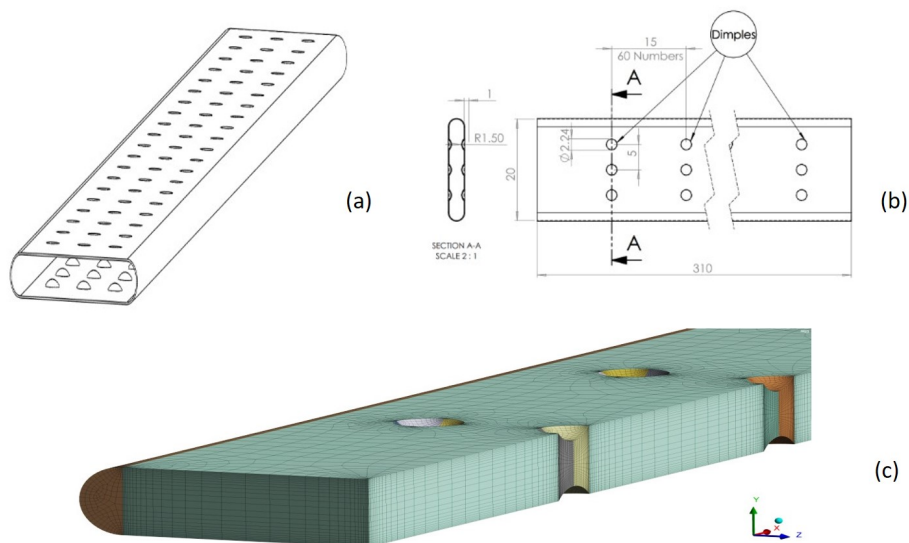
Dimpled flat tube configuration: (a) isometric view, (b) side and top view with specification, (c) meshed view.
